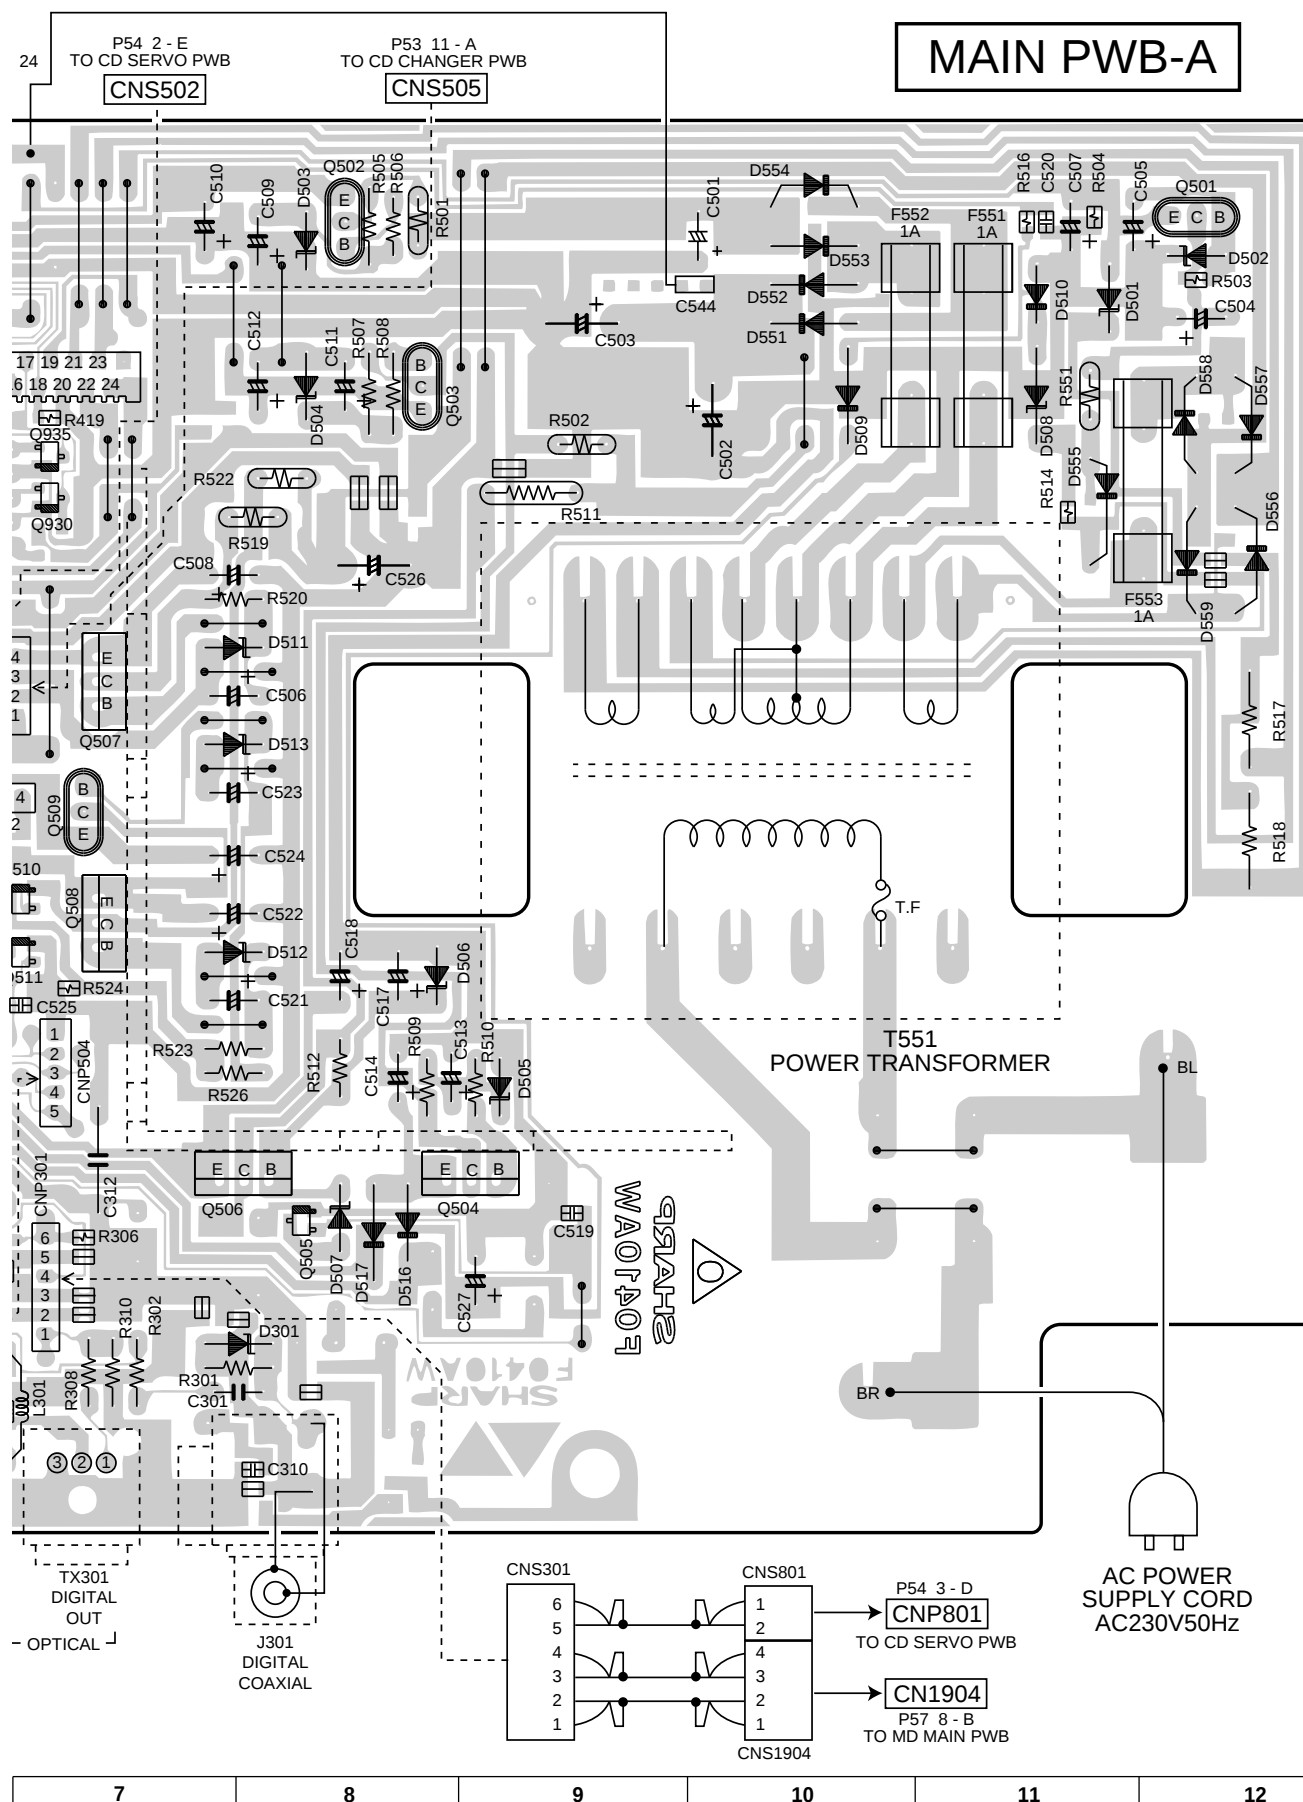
WIRING SIDE OF P.W.BOARD (2/8)
